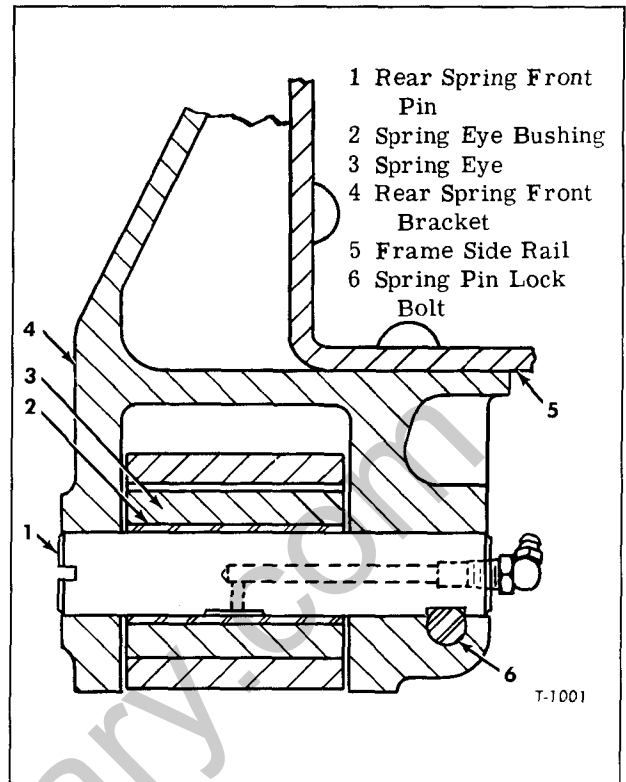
Section Through Spring Eye and Front Bracket (Typical)
